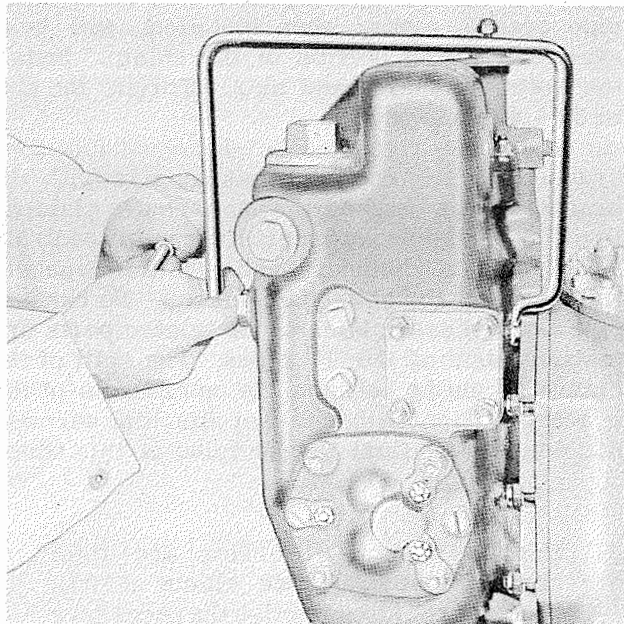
Removing Rear Oil Pump and Sump Housing Rear Attaching Nuts
